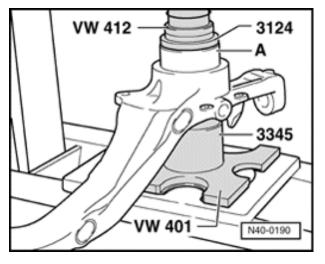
Pressing wheel bearing into wheel bearing housing with 82 mm diameter
